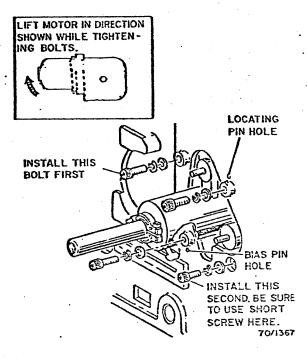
Main Drive Motor and Gear Box Assembly Replacement
